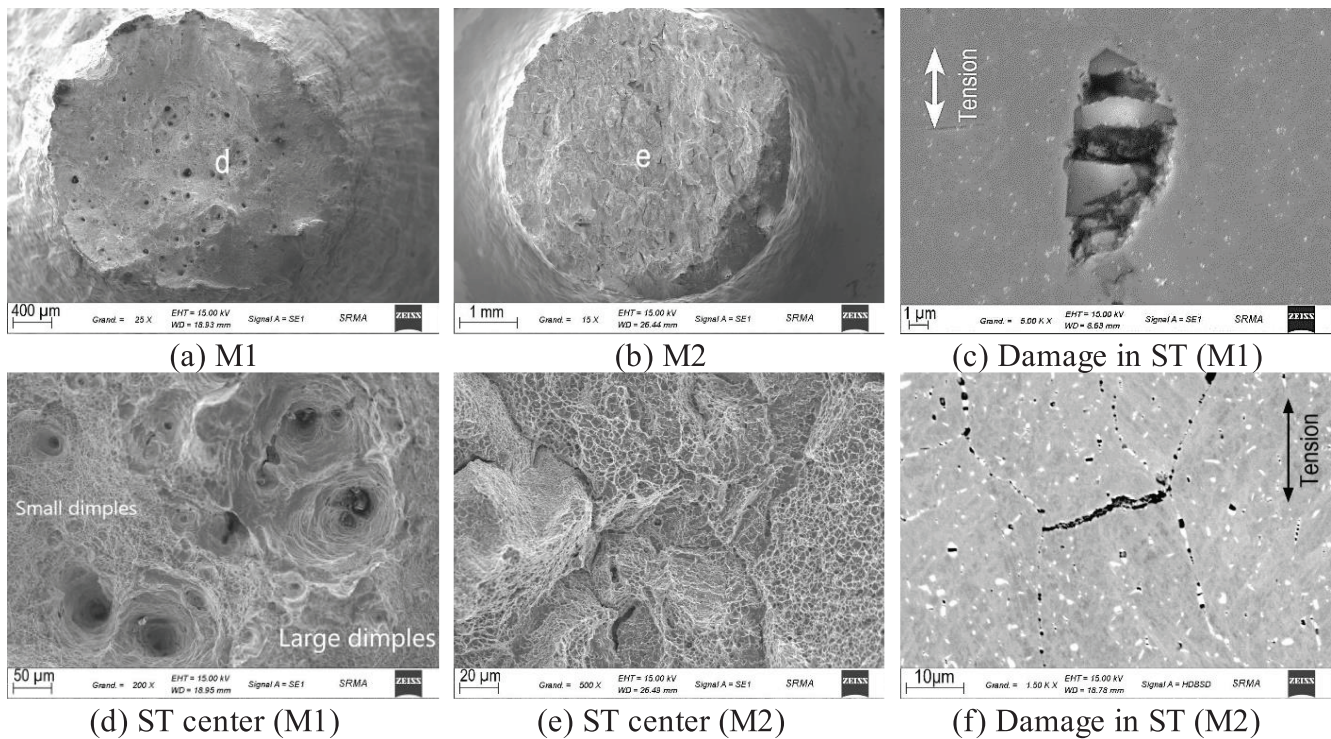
| Photographs of fracture surfaces and damage on polished cross-sections for tensile specimens (SEM observation). (a) Macroscopic view (M1 material). (b) Macroscopic view (M2 material). (c) Polished cross-section showing damage in material M1. (d) Fractographic view at the center of a specimen (M1). (e) Fractographic view at the center of a specimen (M2). (f) Polished cross-section showing damage in material M2. [Colour figure can be viewed at [wileyonlinelibrary.com](https://onlinelibrary.wiley.com)]
